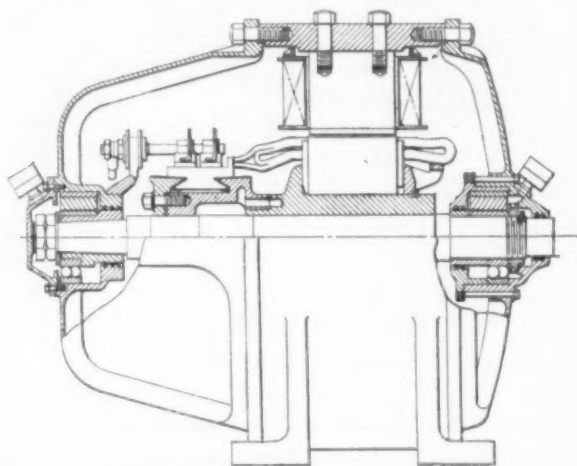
Composite Mounting Using Both Balls and Rollers in the Bearing
